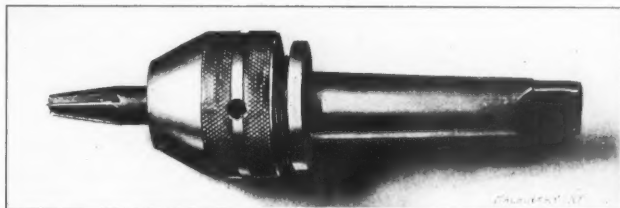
Special Cutter Chuck for the Die-sinking Machine
